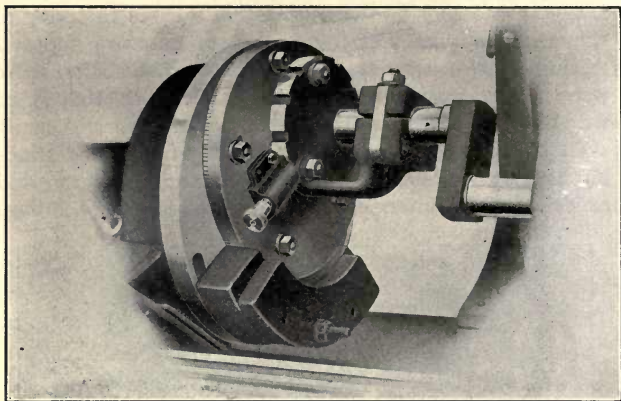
Work-carrying fixture for grinding crankshafts on Landis crankshaft grinding machine.
